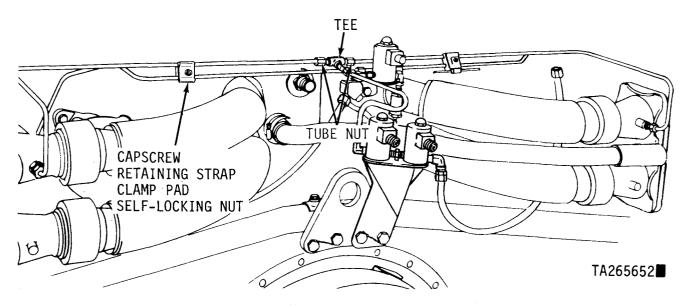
1. Removing or installing smoke generating system fuel tubes, model AVDS-1 790-2C and AVDS-1 790-2D engines.
